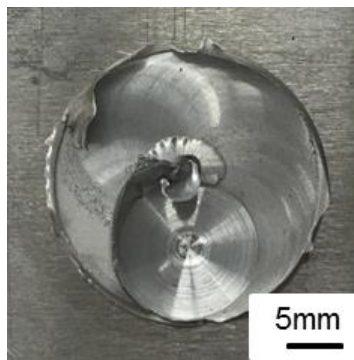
Top view of the joint geometry from the pure circular path welding
